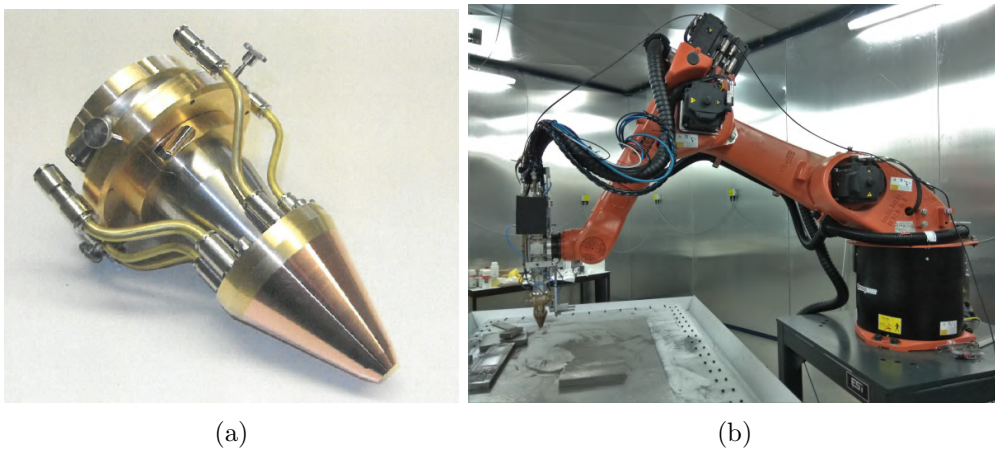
Laser cladding head (a) and DED setup (b) [101].
